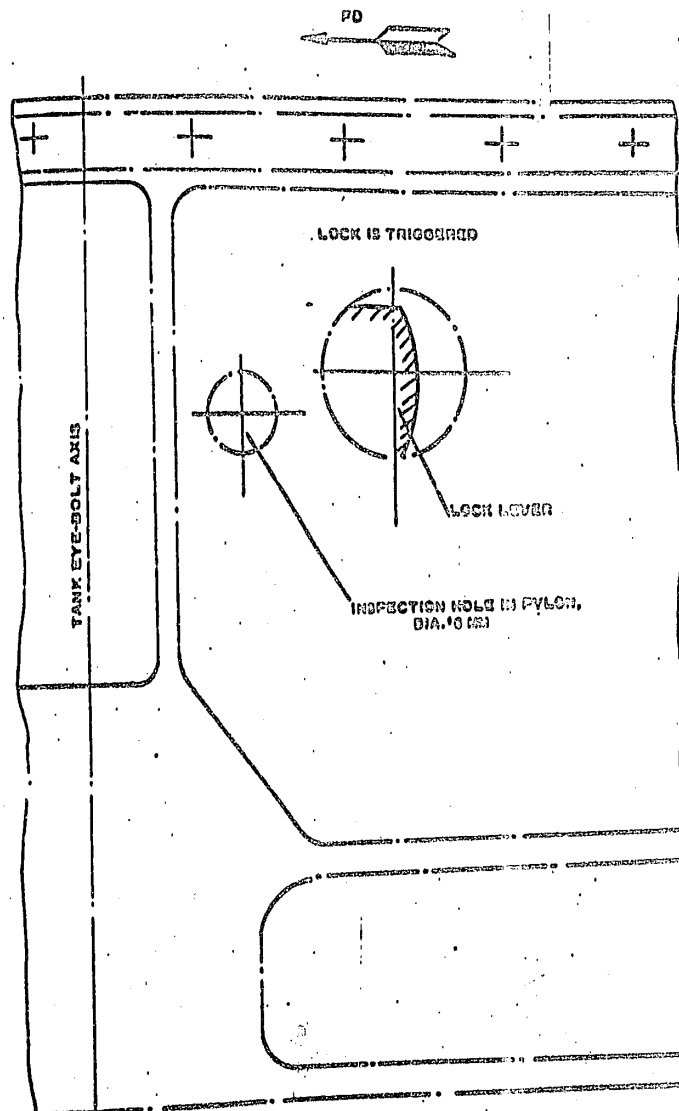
A VIEW ON PYLEON INSPECTION HOLE
